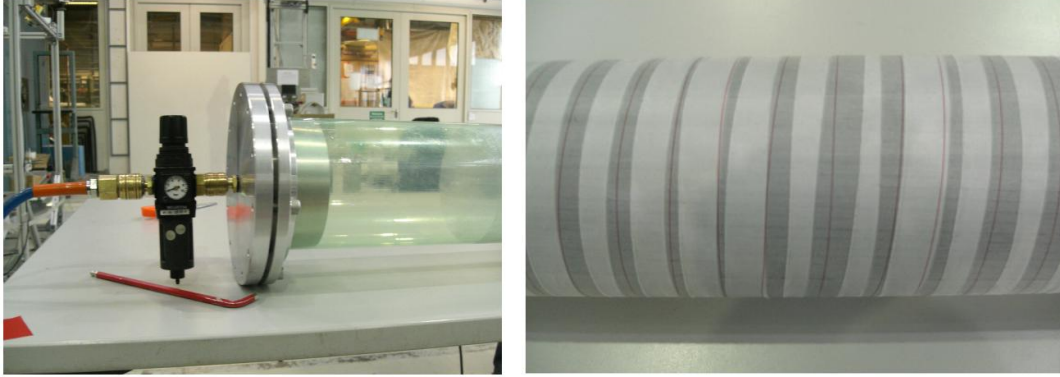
Flange and inner nylon hose under pressure (left). Peel ply bandage (right).
